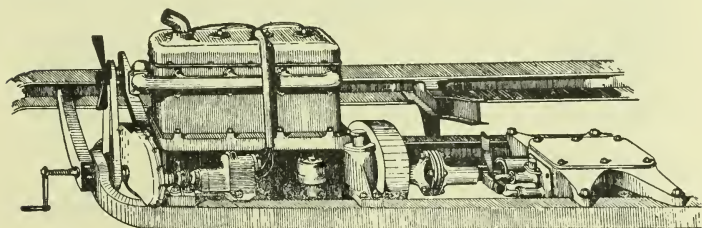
SUB-FRAME MOUNTING OF THE TYPE-J BUS
